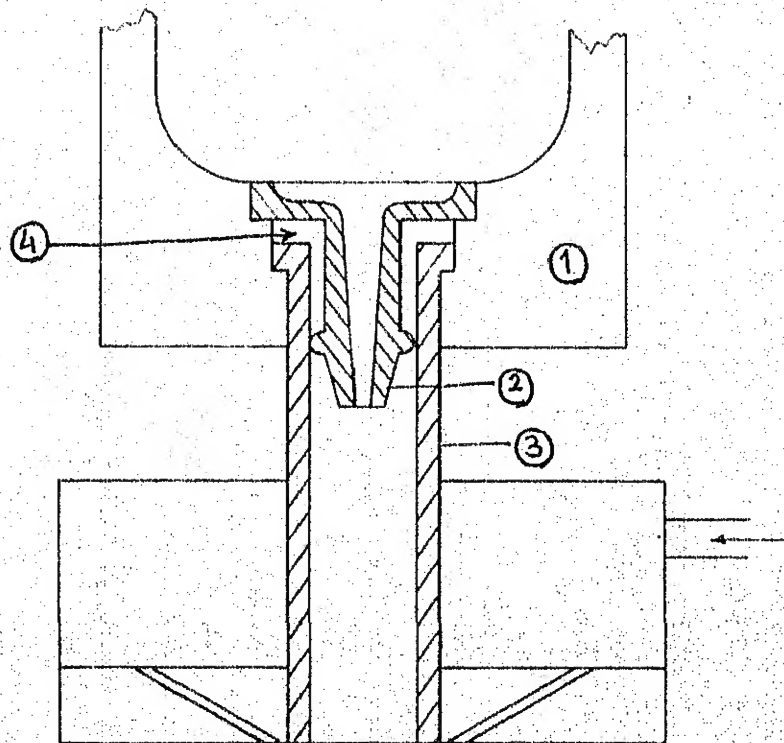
NOZZLE ATOMIZER ASSEMBLY
